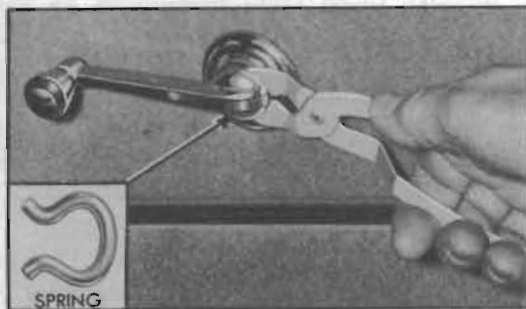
Removing Handle Retaining Spring With Pliers KMO 601
